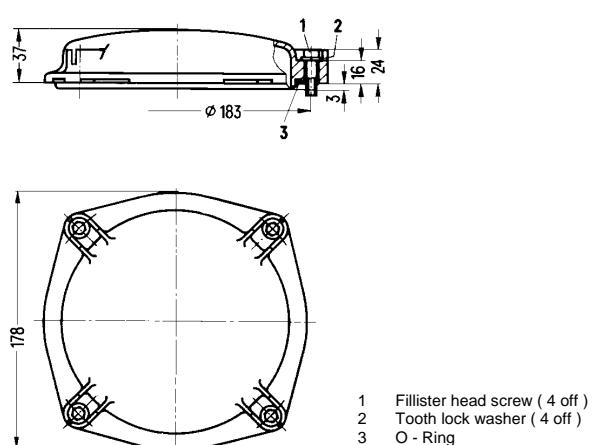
Protective cover to protect the plug assemblies on the actuator with the top of the plug removed
